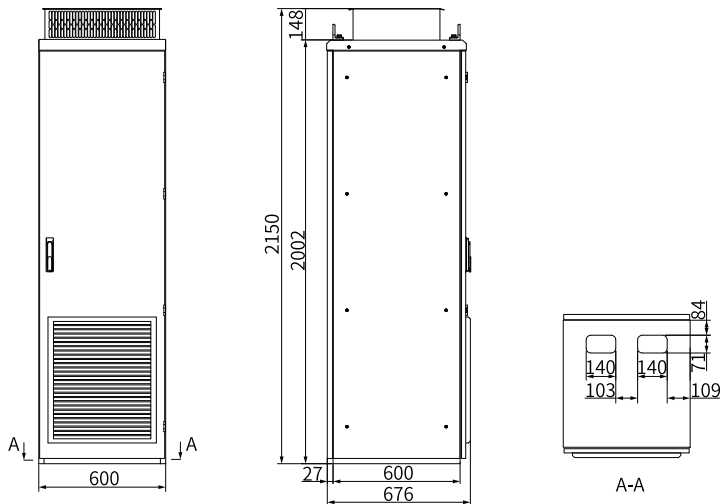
Dimensions of 2 x H8 drive cabinets (mm)
